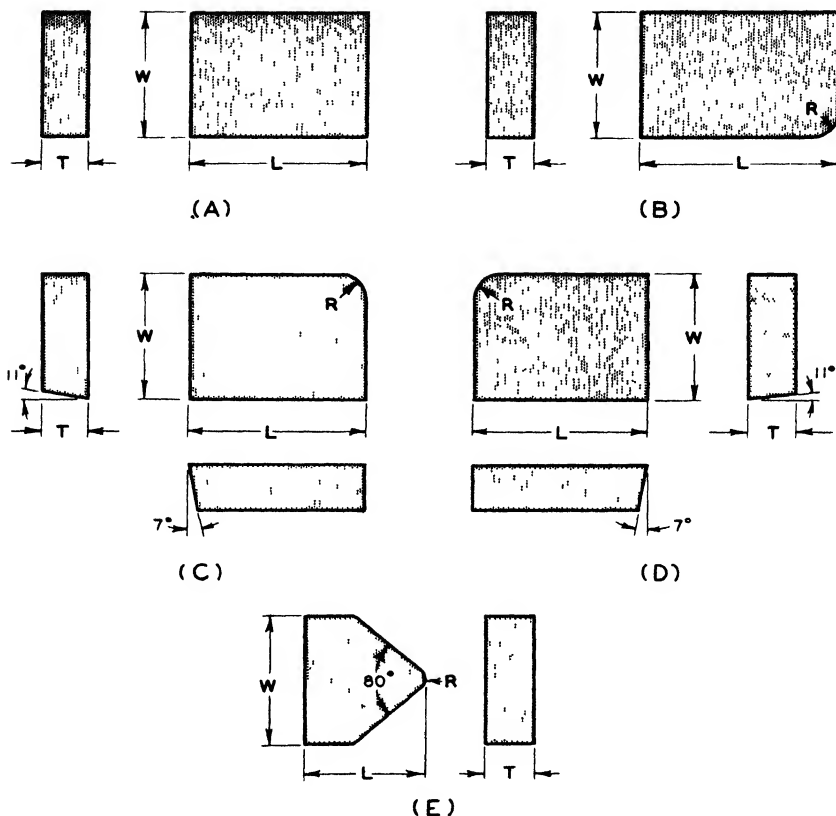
Representative Standard Blanks in Use Throughout Industry.
